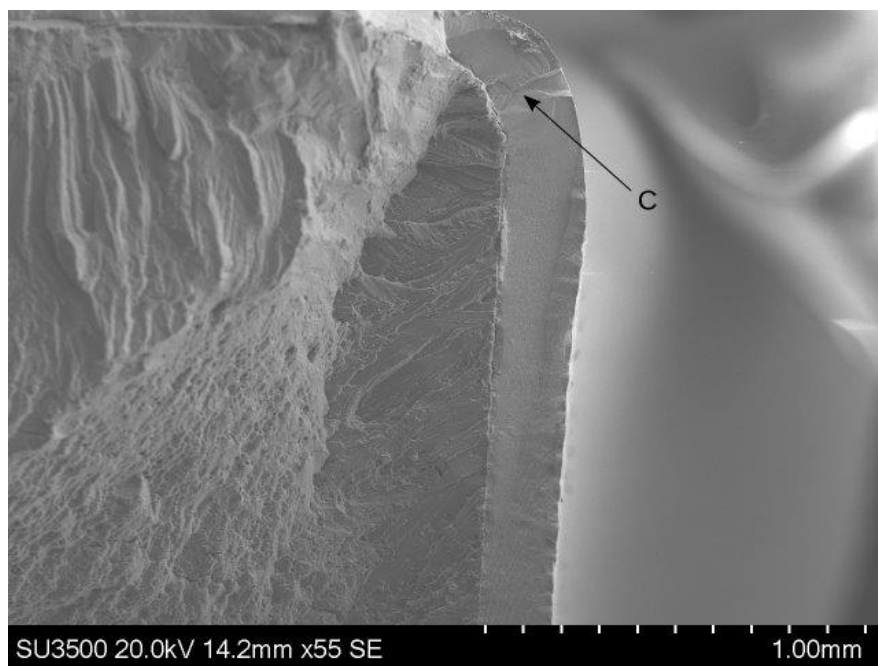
Coating feature at Location C in the fracture surface of Specimen H1.
